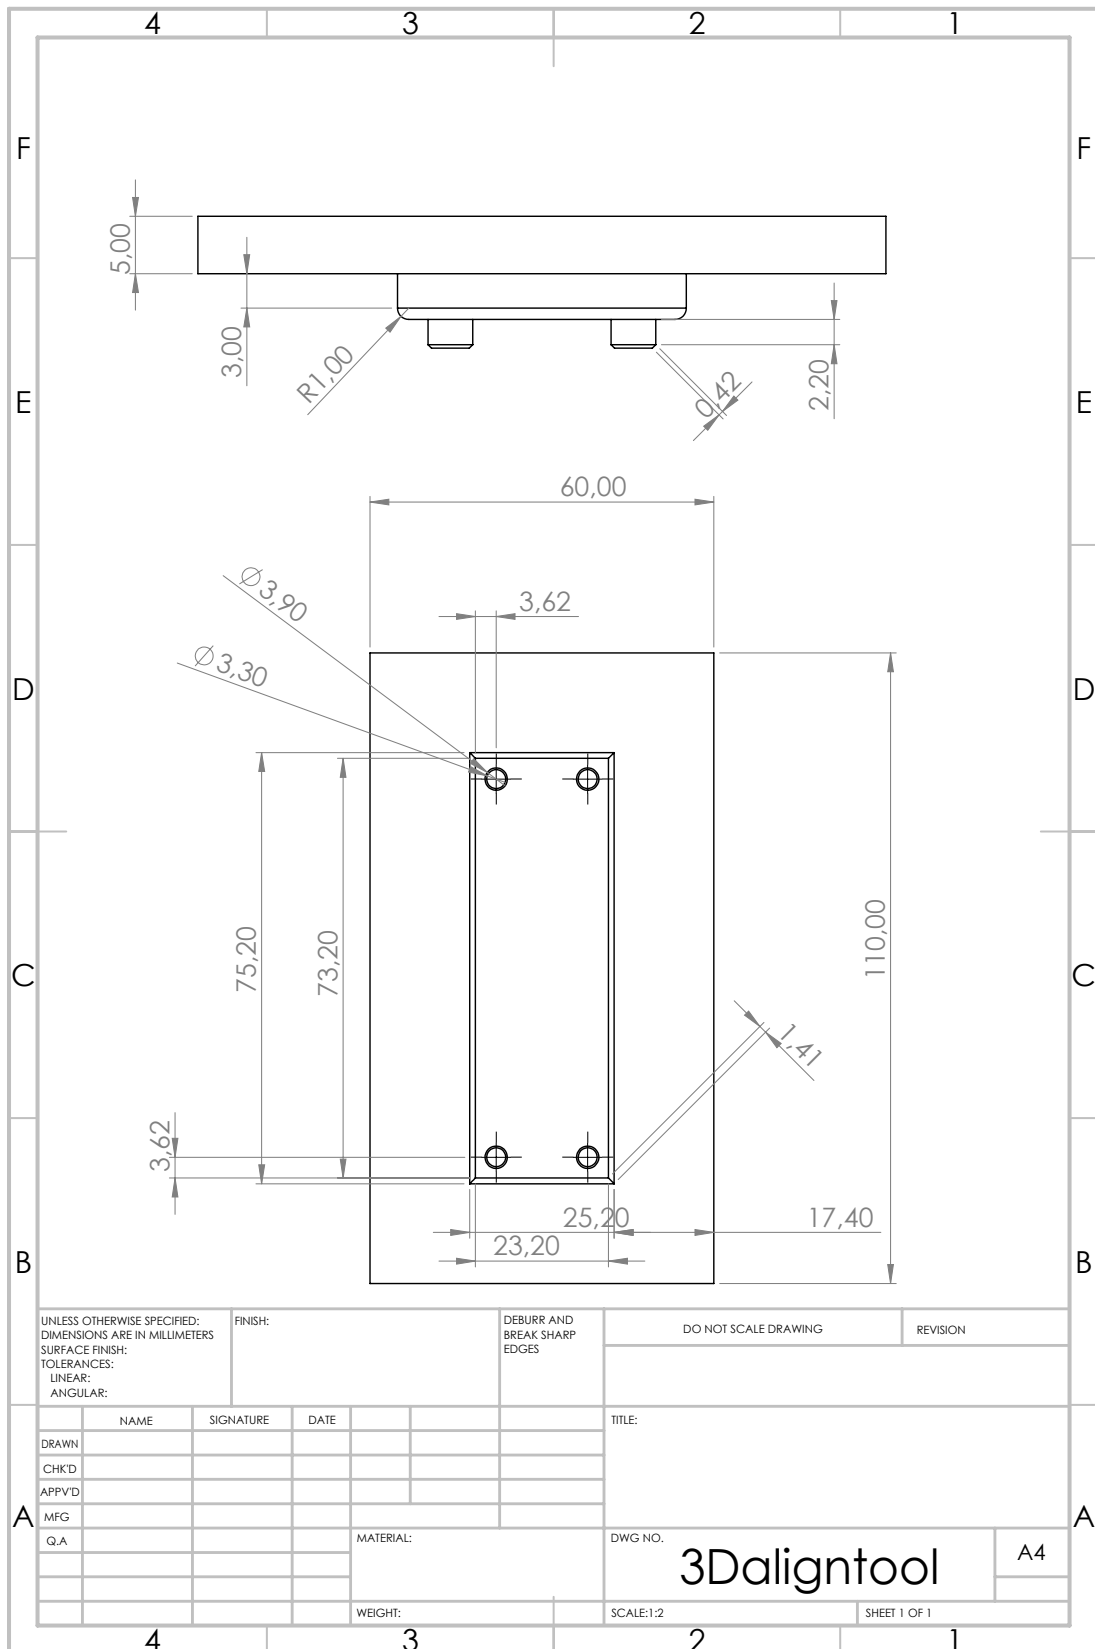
3D printed alignment tool SolidWorks technical drawing
